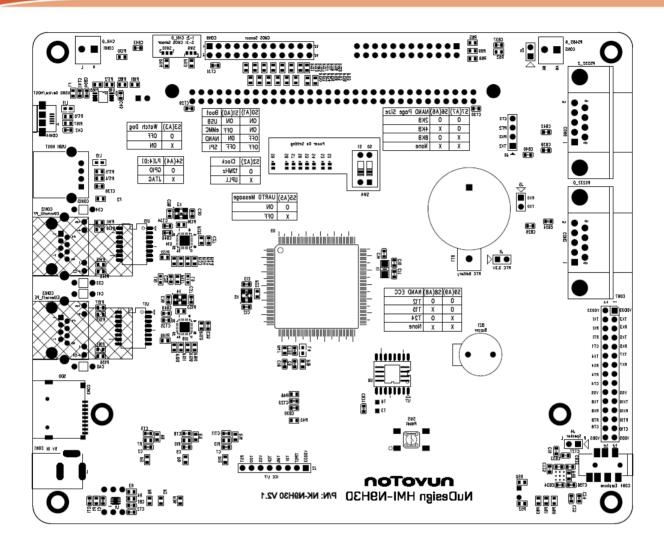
NuMaker-emWin-N9H30 Back PCB Placement
